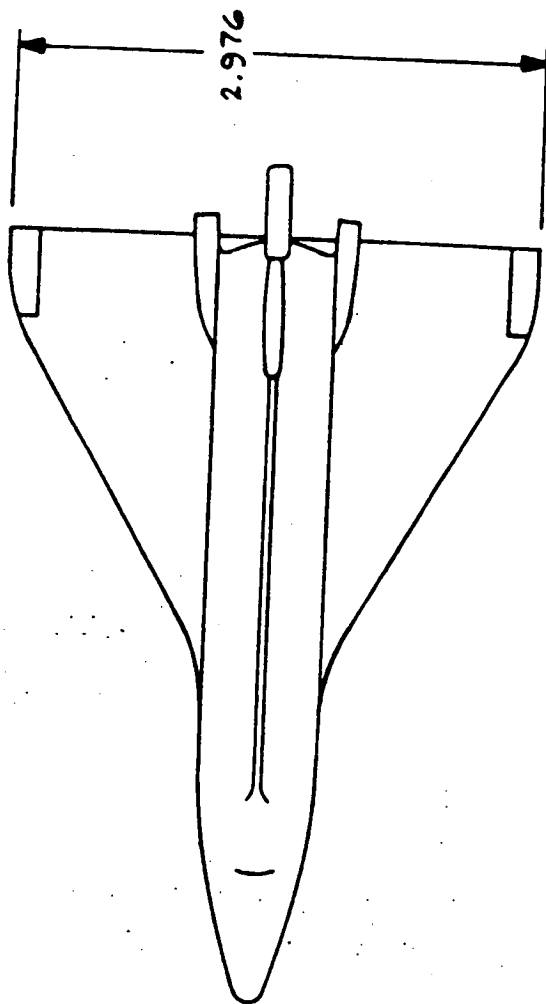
BOOSTER ASSEMBLY DRAWING
